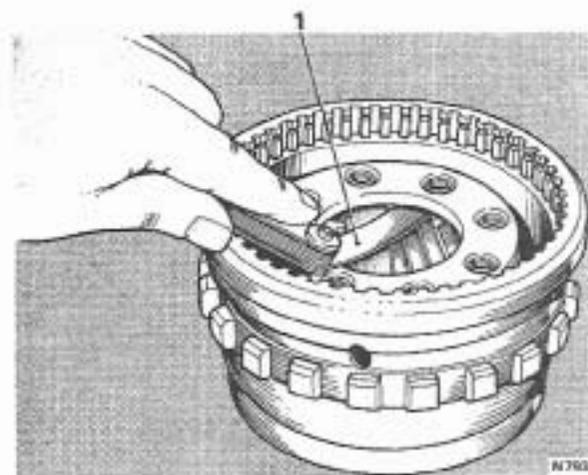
CHECKING OUTPUT CARRIER PINION END FLOAT
